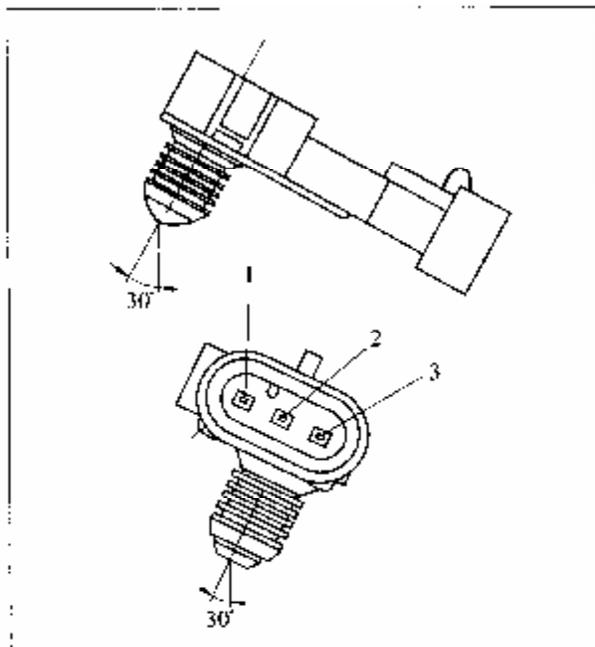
Installation of Air Intake Manifold Absolute Pressure Sensor
